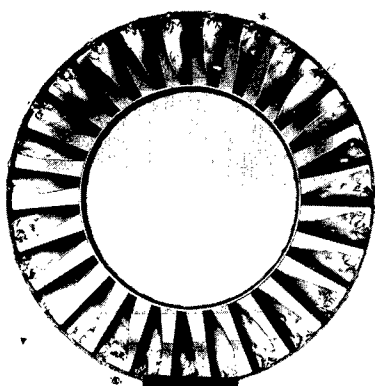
Damage to inlet guide vanes caused by Dzus fastener.
